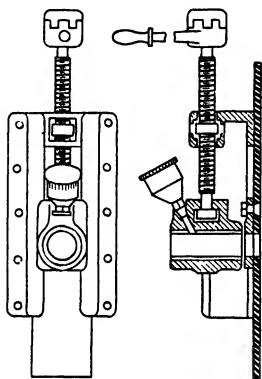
Take-up with Dust Seal for Steel or Wood Boot.
